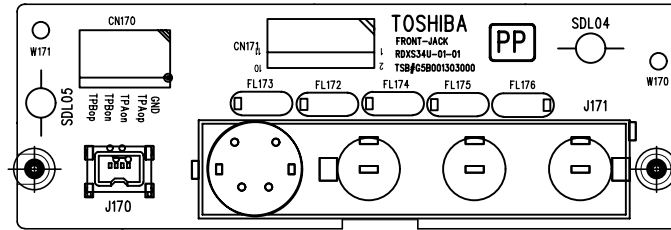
EU55 Front Jack PC Broad (Top side)
